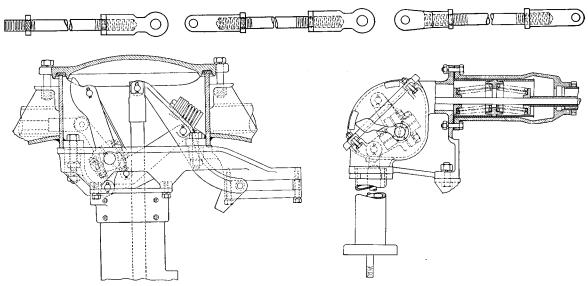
Main Assembly Details, Type G-22, 400-1000 Amperes, 132,000; 154,000 Volt Breakers
